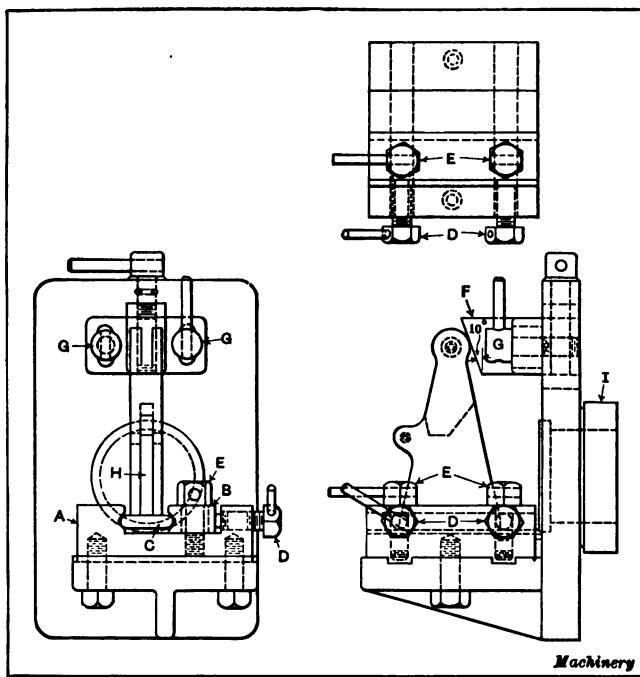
Work-holding Fixture for broaching out Cored Hole H
